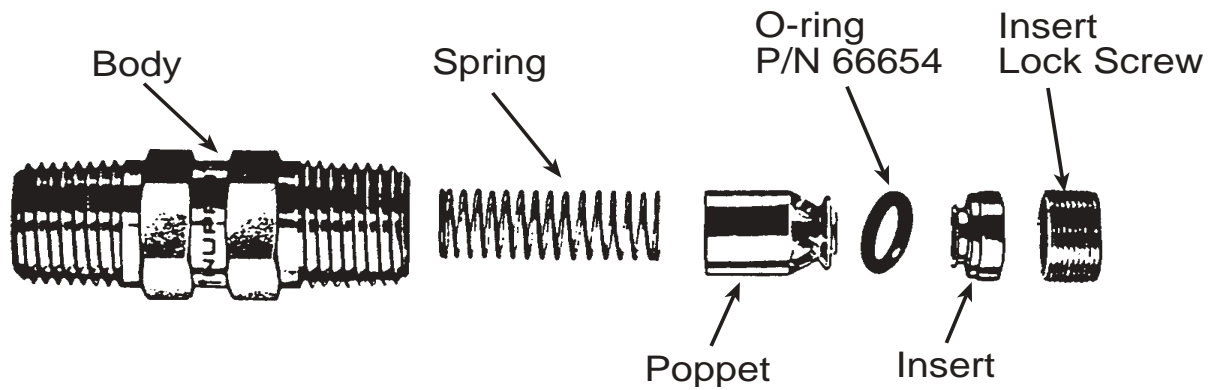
N₂ Inlet Check Valve Assembly (PN 60263)
